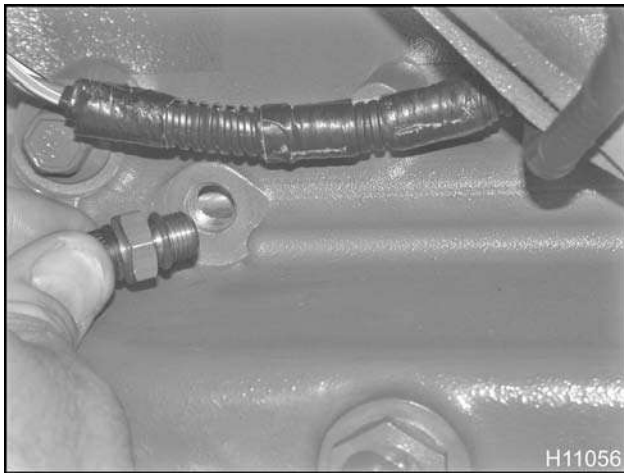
Installing the fuel valve assembly (air bleed and pressure test port)
